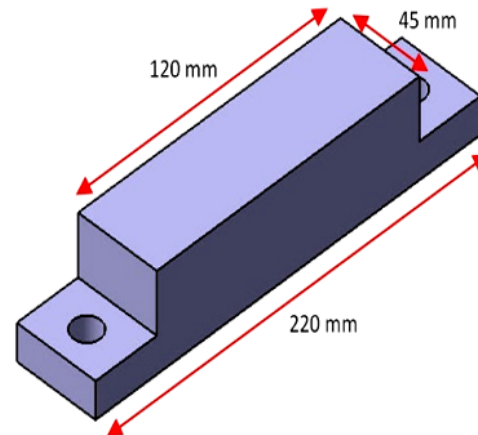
The schematic illustration of unmachined experimental workpiece
